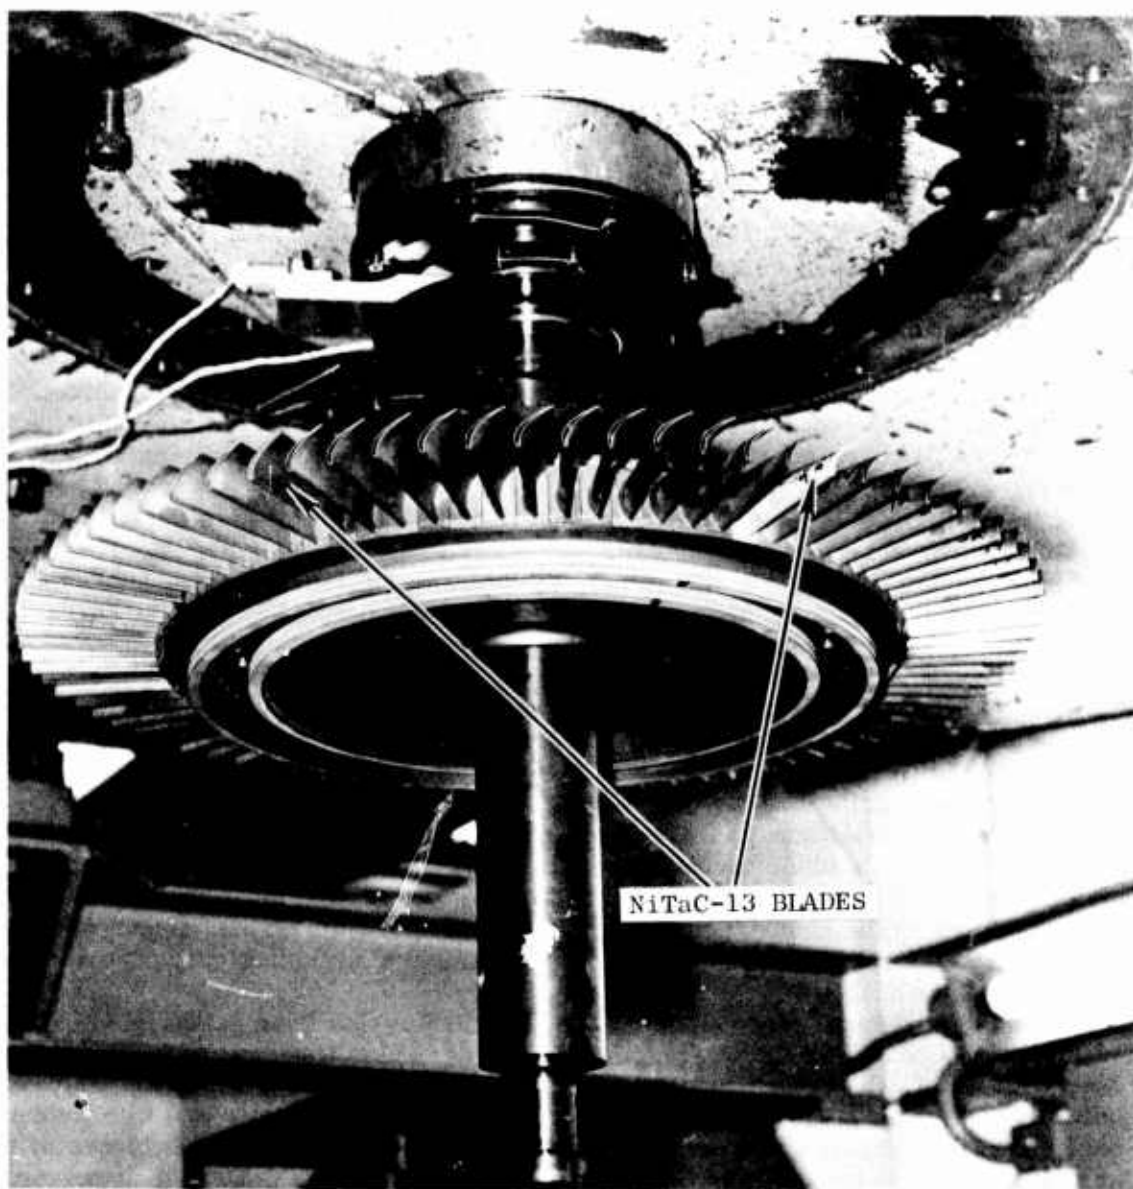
J101 LPT Rotor Assembly Prior to Spin Pit Test
